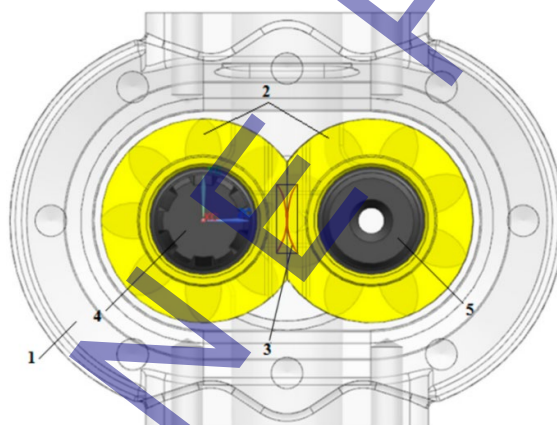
Model of the gear pump with a biaxial connection with installed expanding elements: 1 – housing; 2 – bushing; 3 – elastic expanding elements; 4 – driving shaft-gear; 5 – driven shaft-gear
